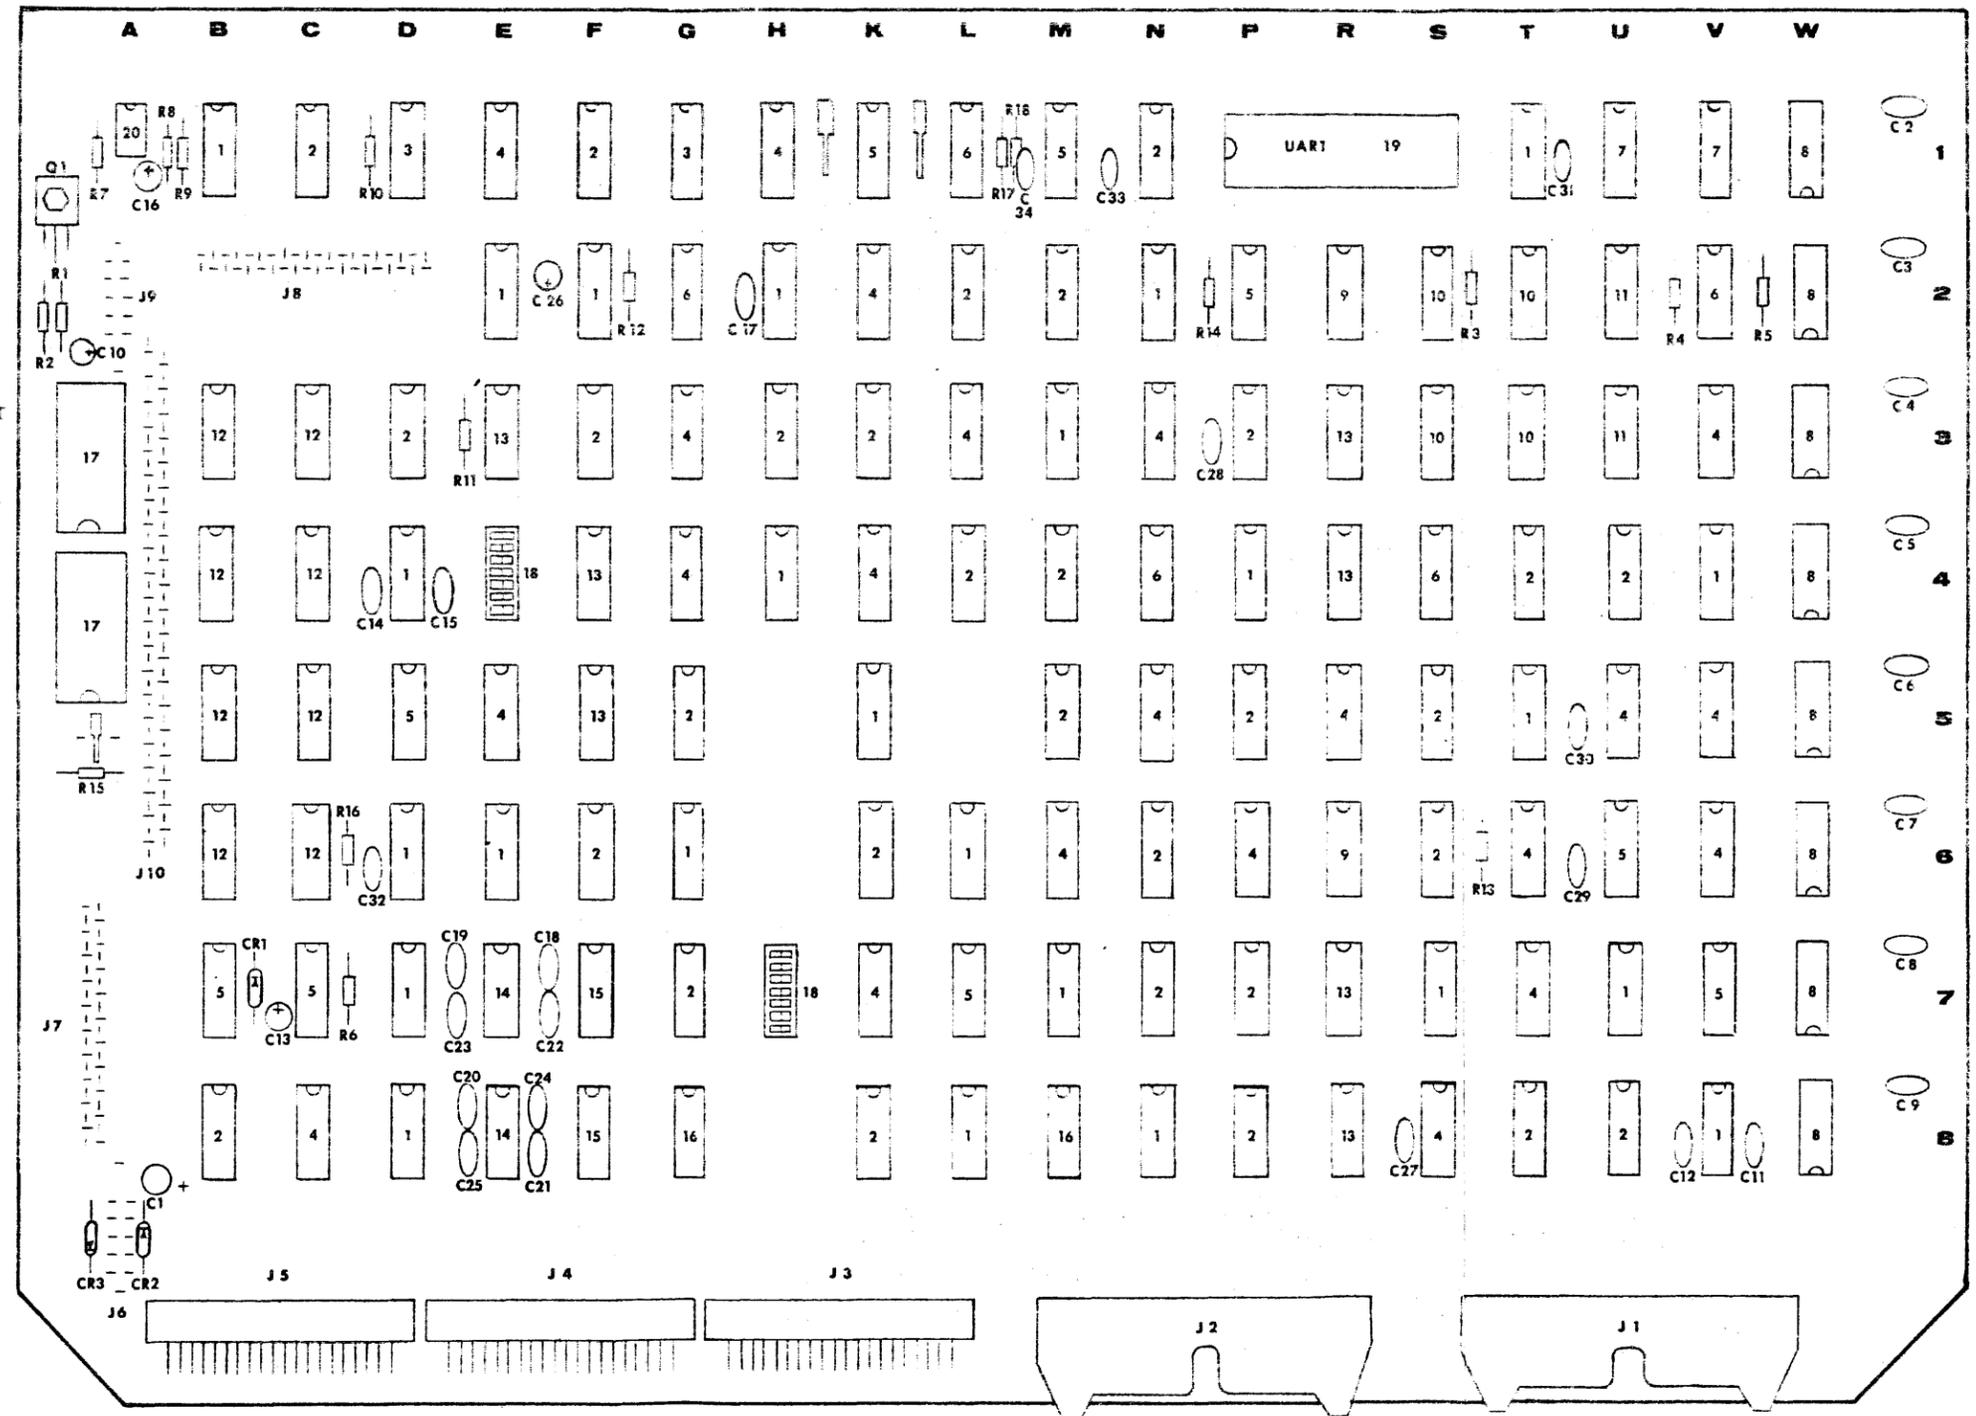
EIA INTERFACE BOARD - PART NO. 1050A0840
